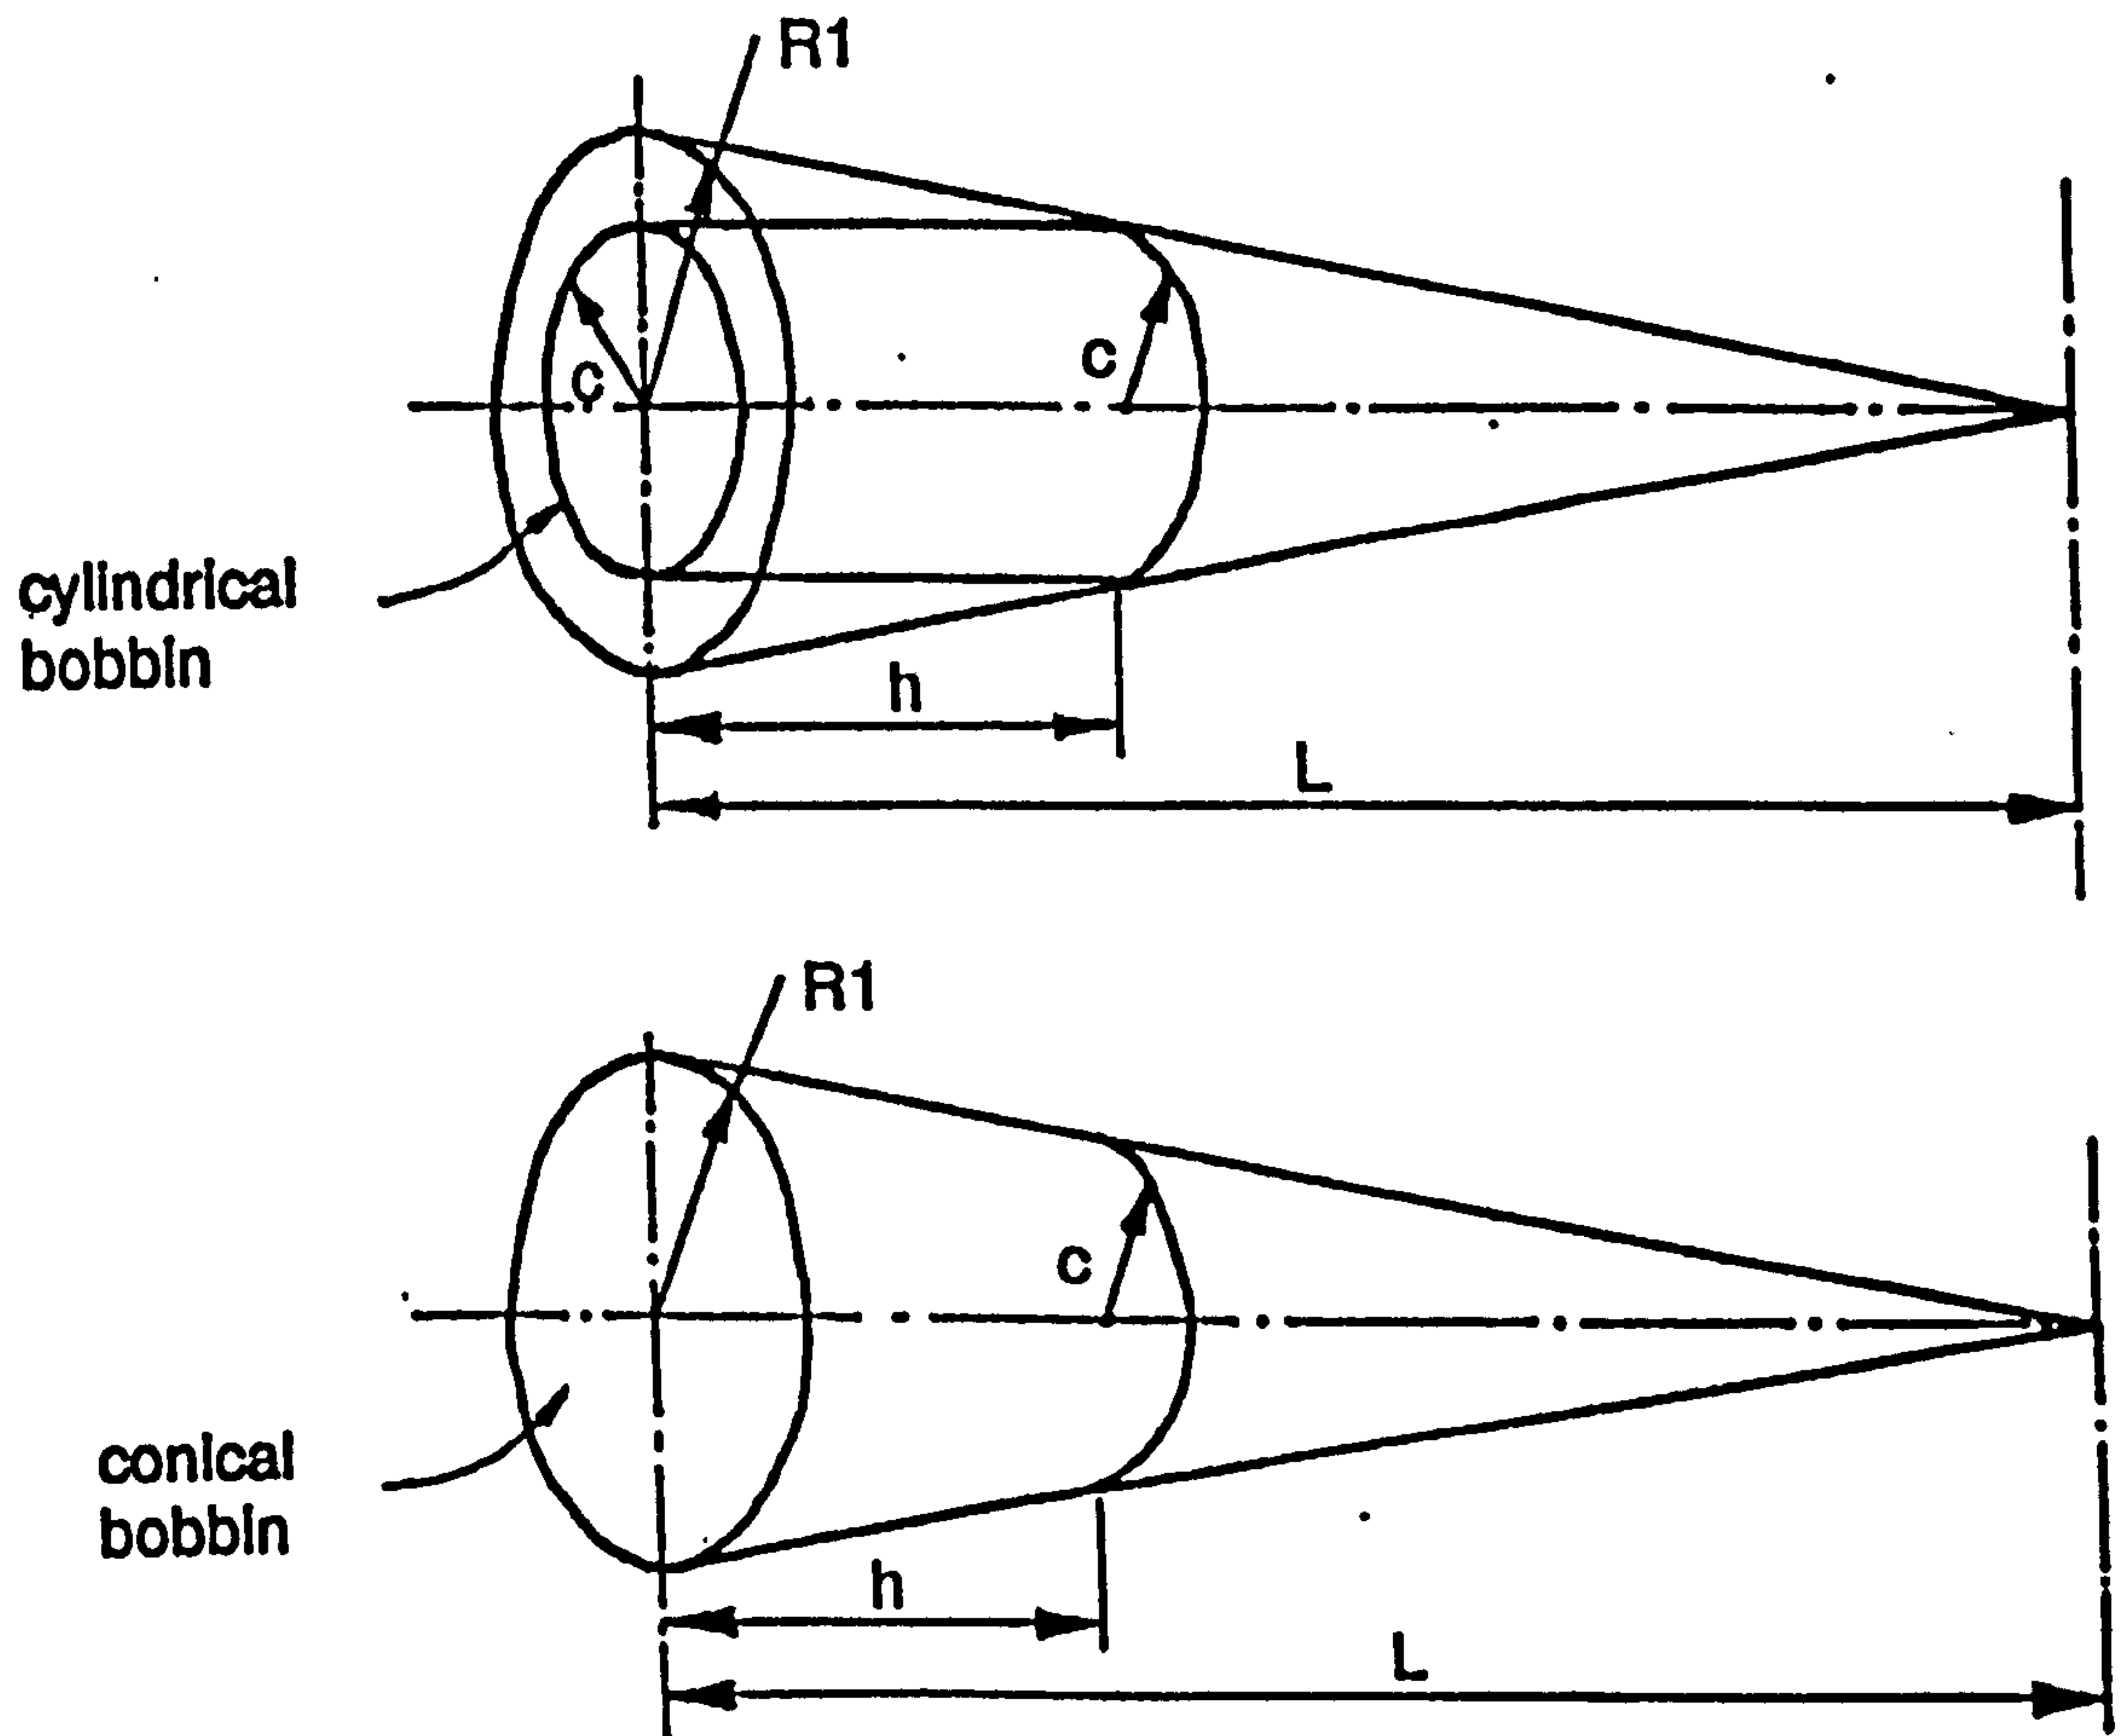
Cylindrical and conical bobbin dimensions
